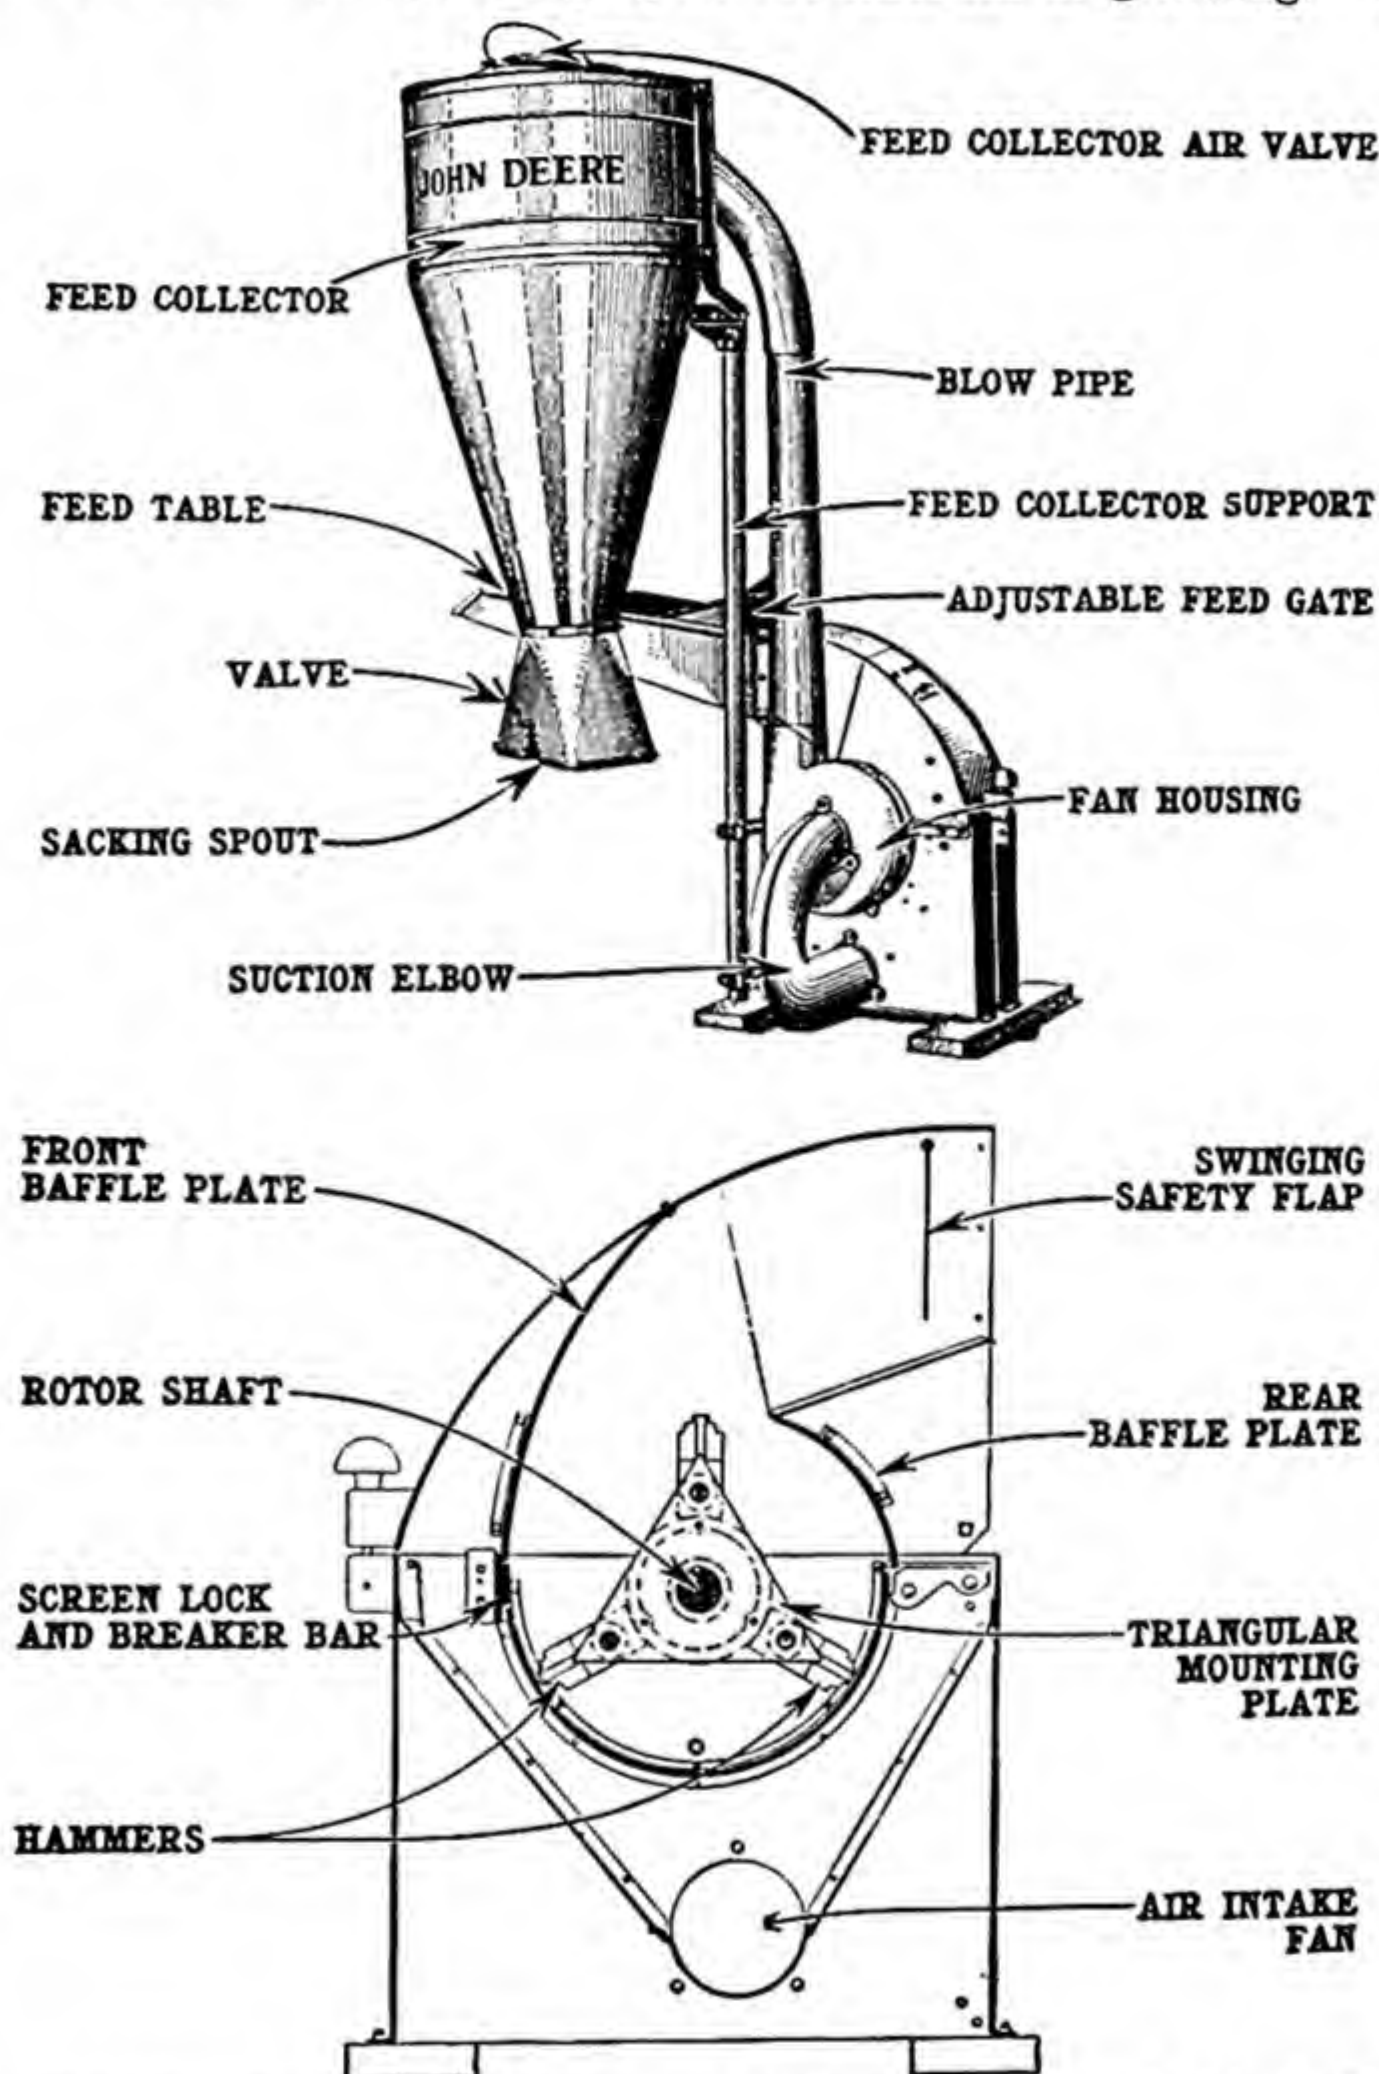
Outside and cross-sectional views of hammer mill equipped with rigid hammers. of the holes ranges from $\frac{5}{64}$ inch to 2 inches. The smaller holes are used when grinding grains, while the larger sizes are used when grinding roughage, such as sorghum stalks, cornstalks, or hay.
